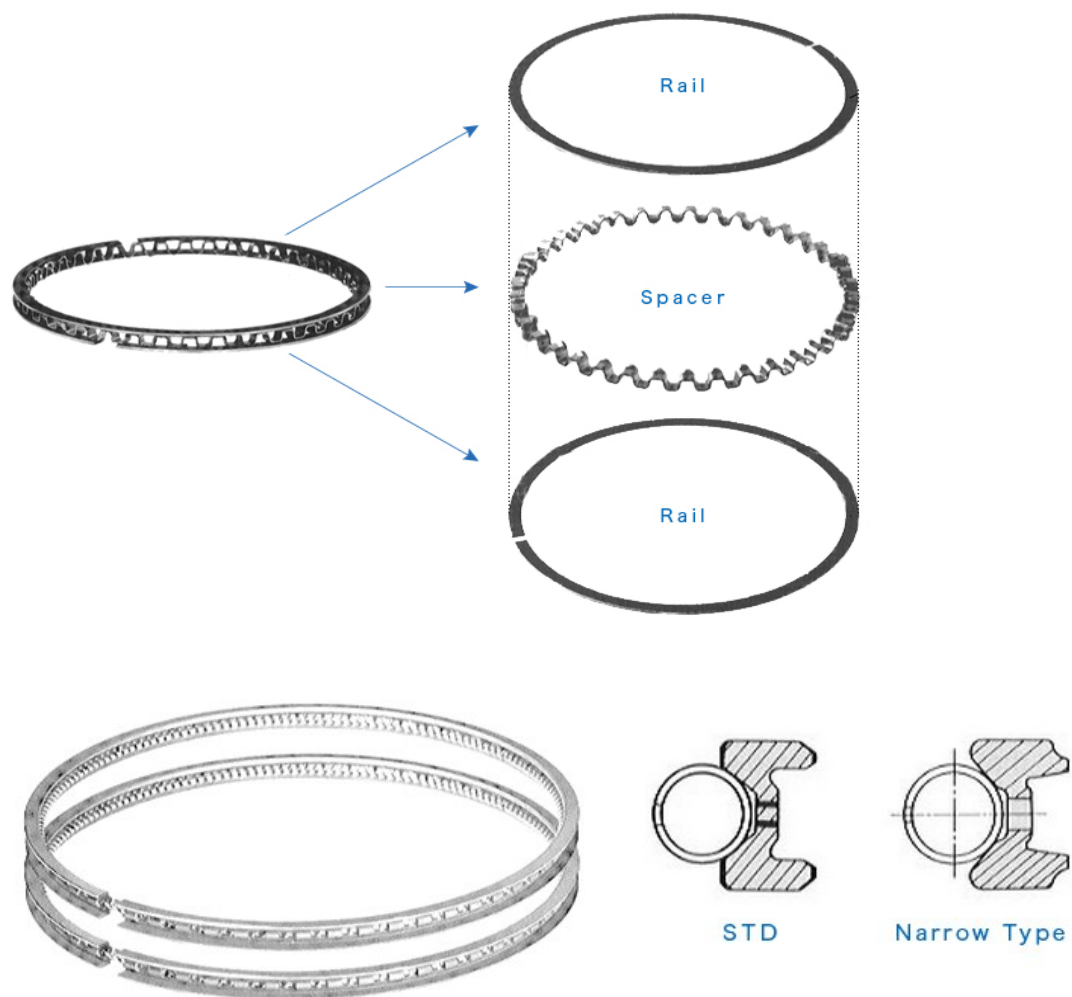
2- and 3 -piece oil control rings (Riken b, n.d).
